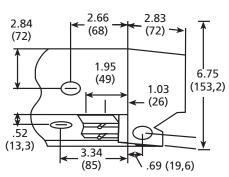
Wiring Compartment Dimensions – in. (mm)
